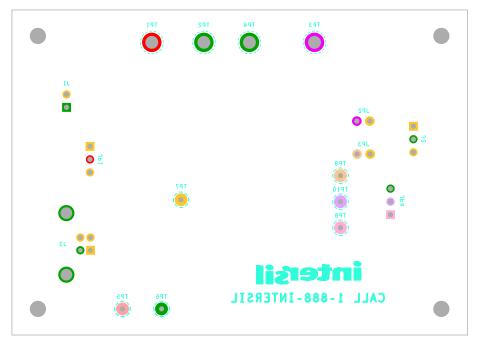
SILKSCREEN BOTTOM (TOP VIEW)
